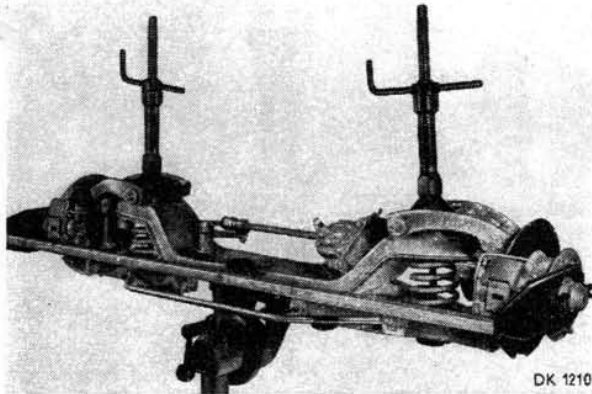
/10 - Measuring Front Wheel Toe-in
